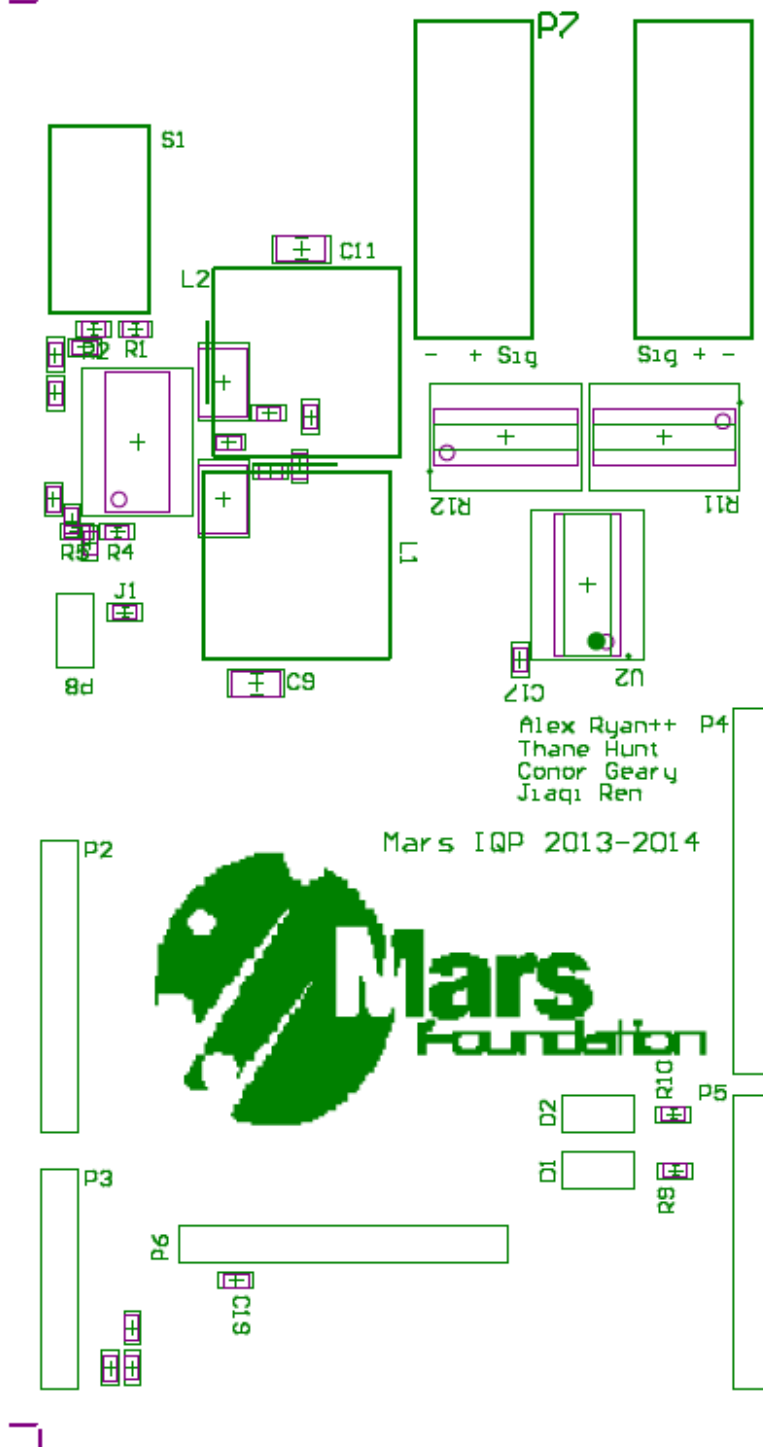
Prototype Rover Shield PCB - Top Silk Screen
